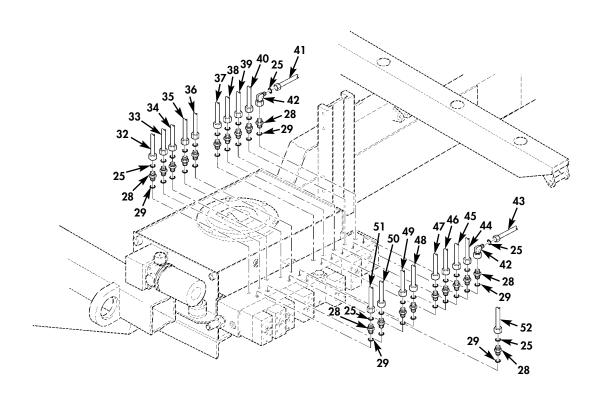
Control Valves and Manifold (Sheet 2 of 2).
